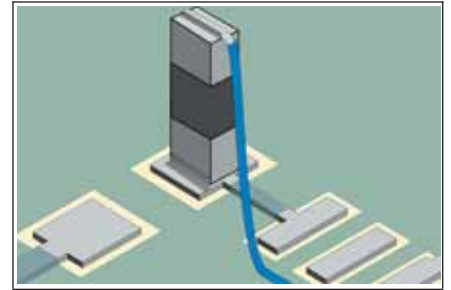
Acceptable Wire soldered to component end, lifted off pad.
